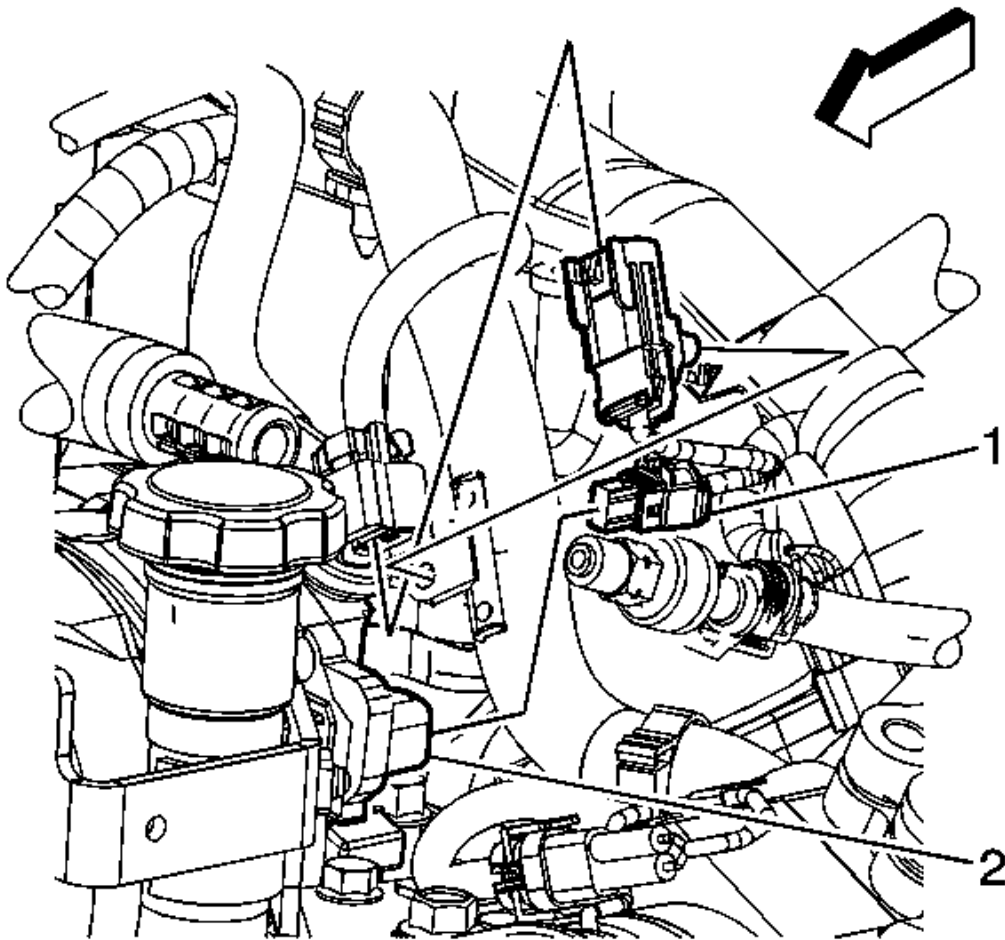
View Of Engine Wiring Harness Electrical Connector & Generator
